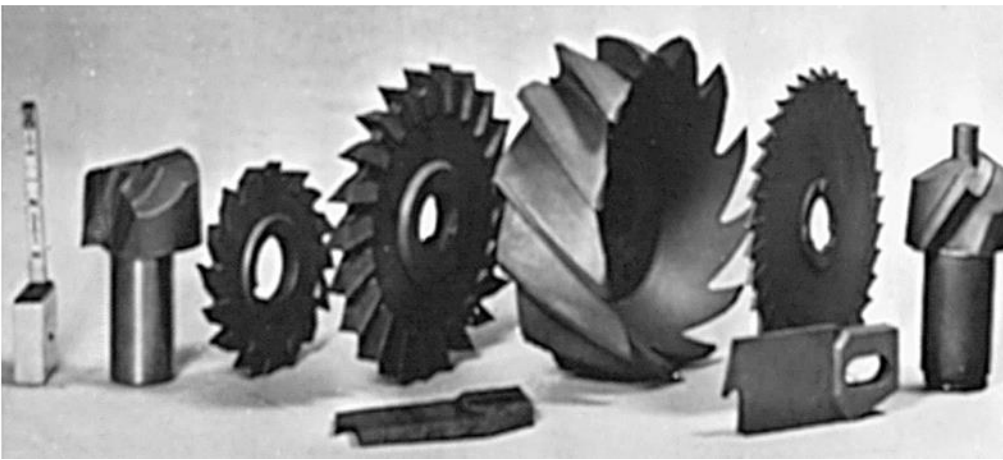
Group of intricate cutters produced by ceramic mold casting. (Courtesy of Avnet Shaw Division of Avnet, Inc., Phoenix, AZ)
